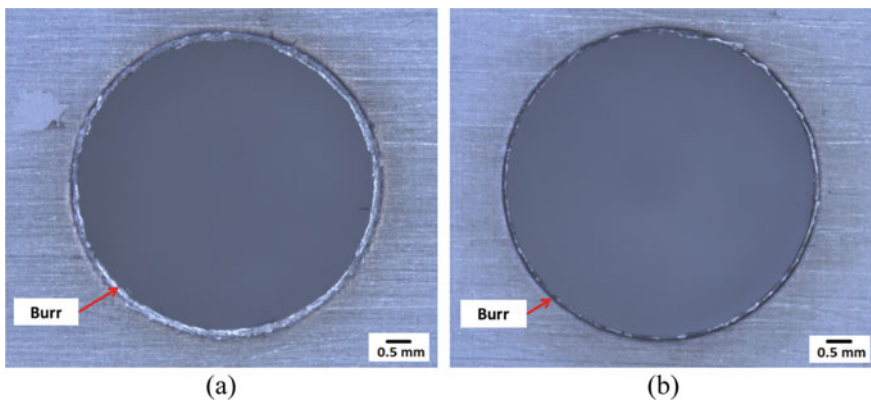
Titanium exit burr at hole 40 produced by a conventional drilling, and b UAD
